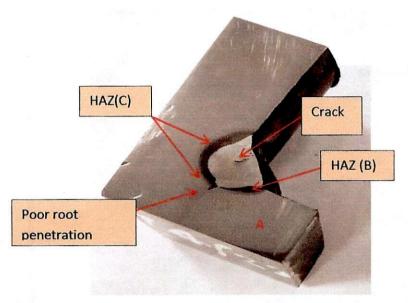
Photomacrograph showing welding defects and weld profile at weld Zone.
